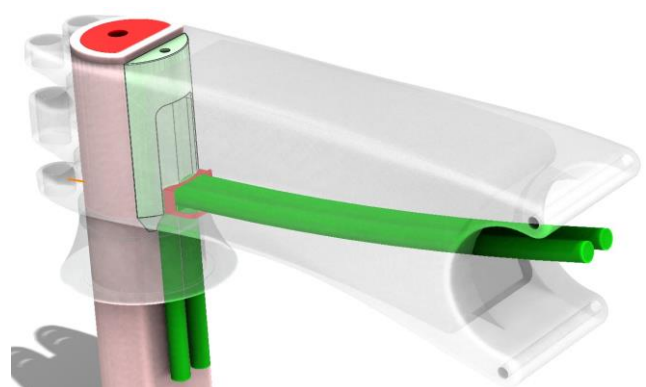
Cable routing through the milled-out hole specific for D-shaped fork steerers; THM Tibia
